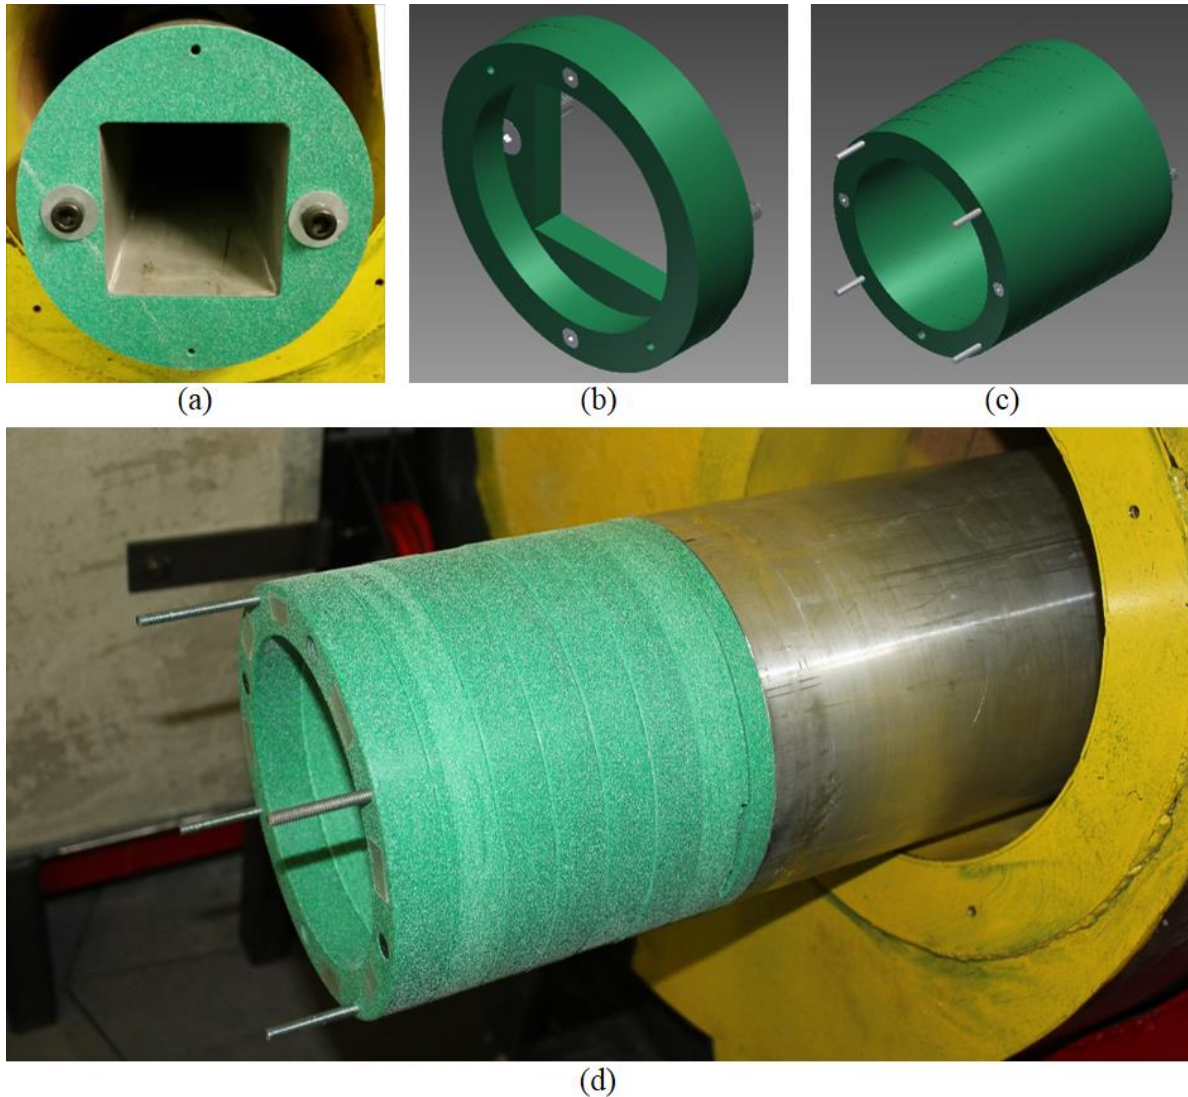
The fixed part of the extension tube: (a) the first piece (picture), (b) the second piece (drawing), (c) the following seven pieces (drawing) and (d) the whole assembly attached to the collimator (picture).
